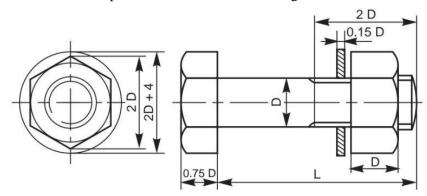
A hexagonal headed bolt with a nut and a washer in position
